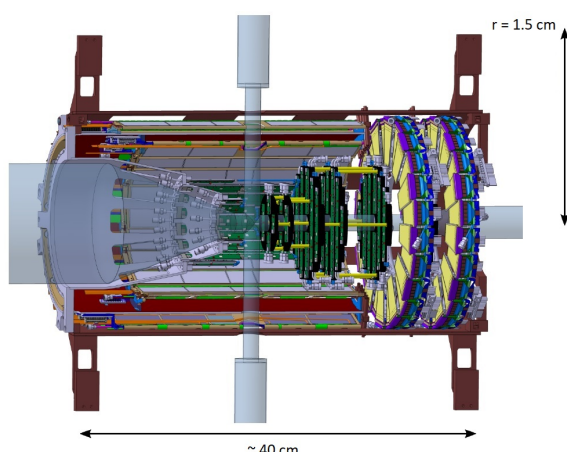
CAD drawing of the MVD including support structure. Image adapted from [111].
